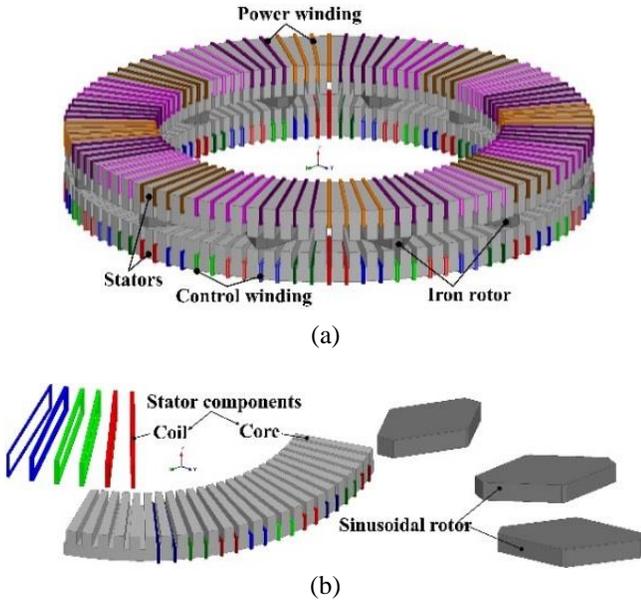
Configuration of the proposed AF-BDFRM. (a) Full machine view (b) Quarter model- detailed view
